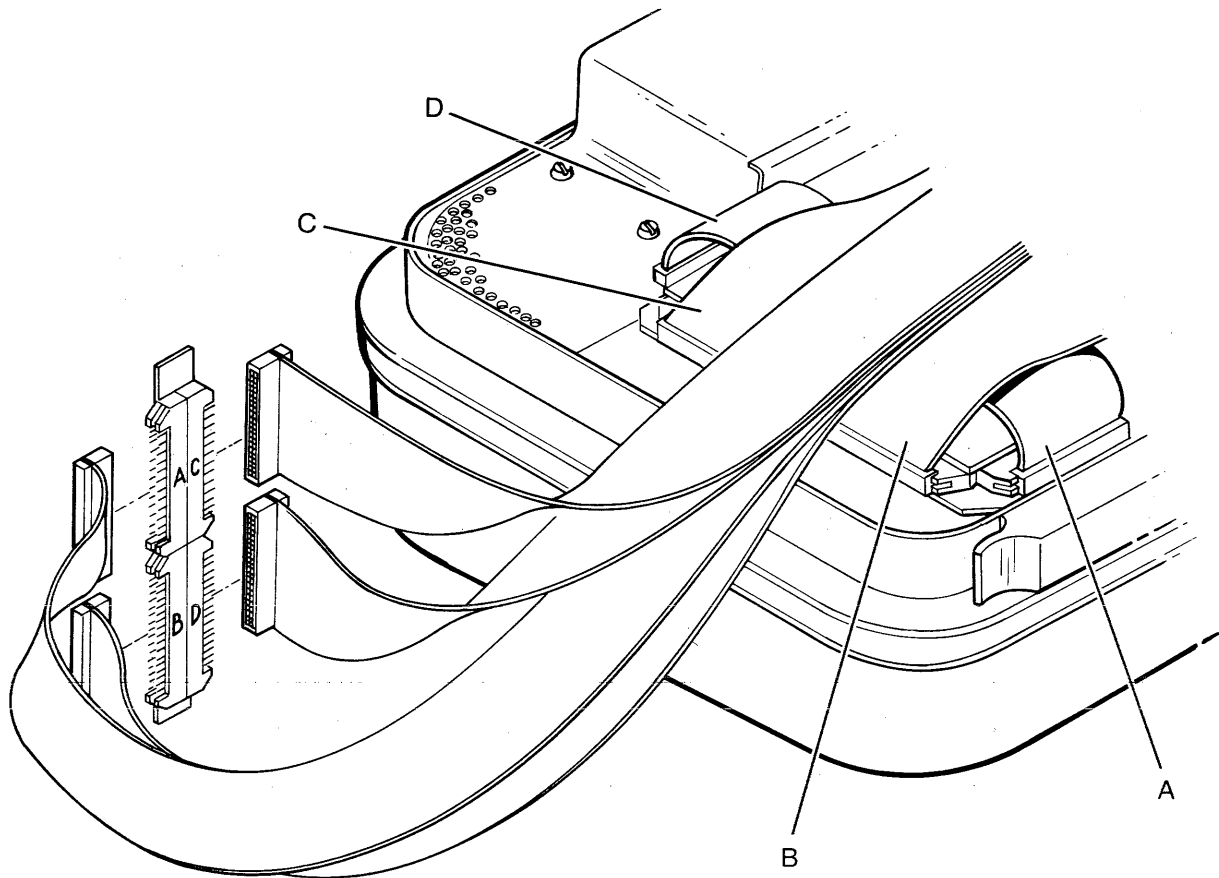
TESTER WITH WRAP PLUGBOARD
